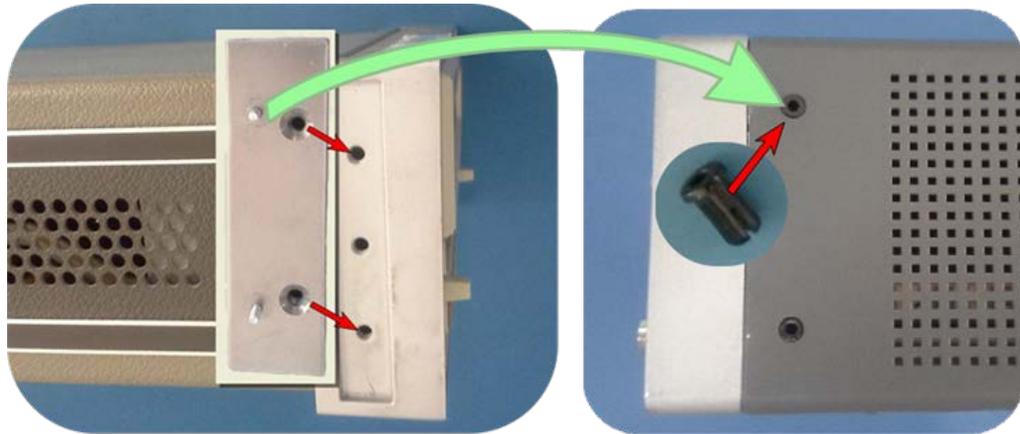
Front assembly plate installation Agilent unit (shown left), GSG unit
